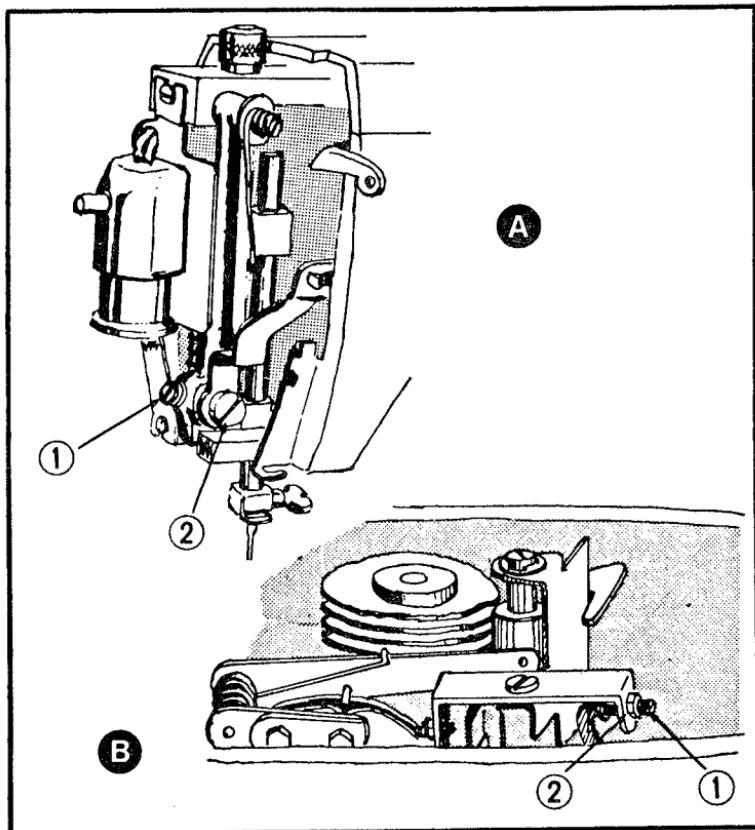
When studying these illustrations relating to White Models with oscillating shuttles, be sure to read the text, as some illustrations apply to side load machines and some to front load machines.
